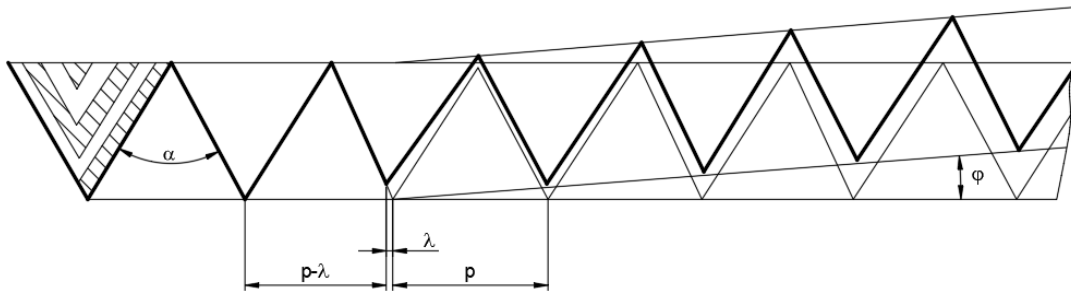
Real machining scheme with linear attack cone executed on the pitch diameter
